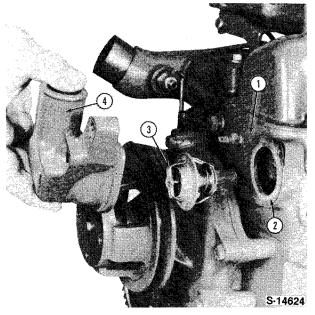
Coolant Outlet and Thermostat Removal 1. Cylinder Head 4. Coolant Outlet
